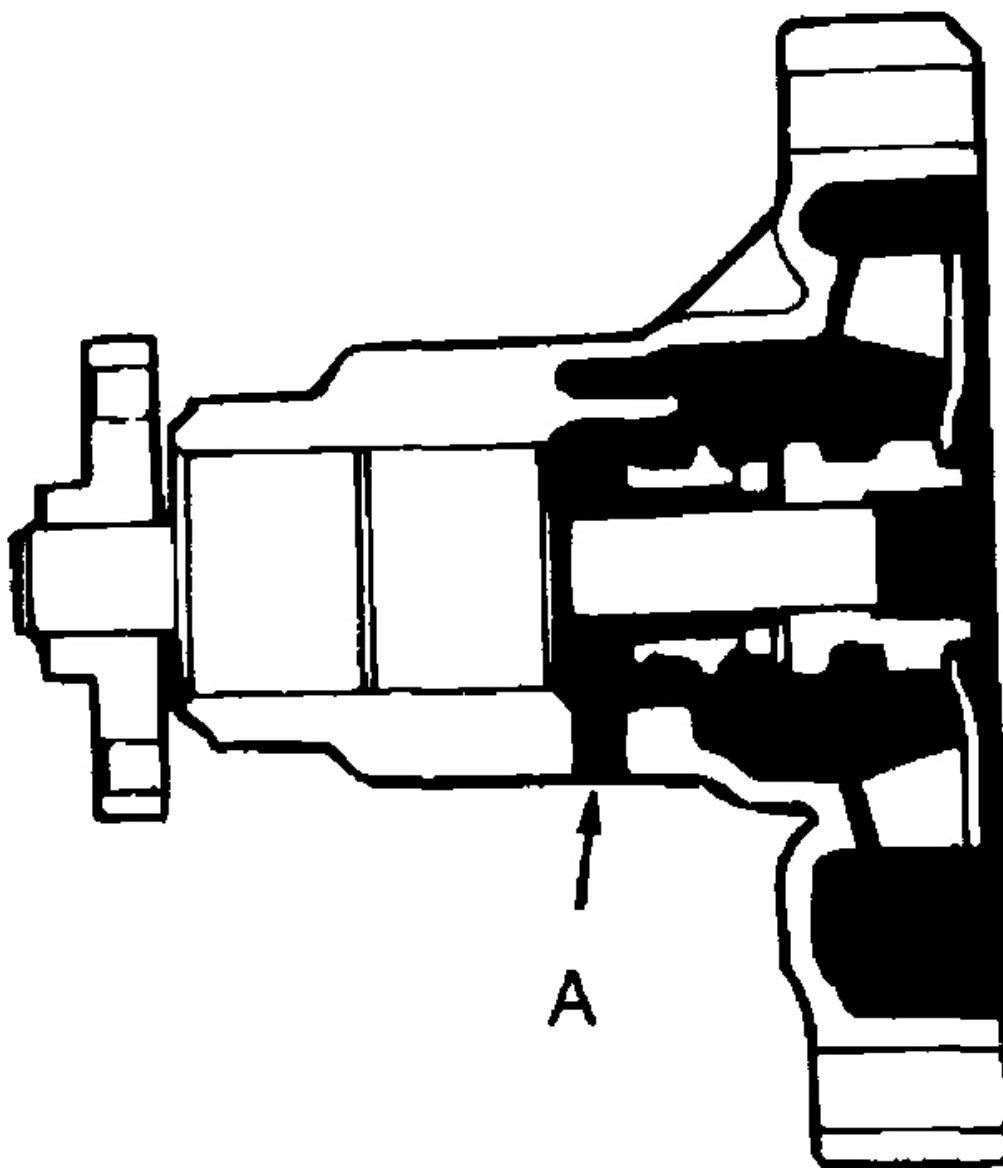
Identifying Engine Coolant Pump Components And Torque Specifications
